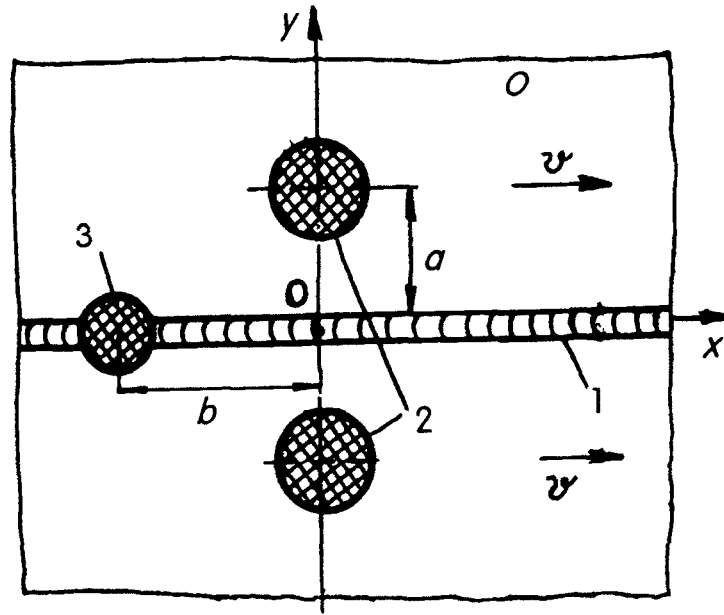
Scheme of thermal treatment of a plate with weld: (1) weld; (2) heating zones; (3) cooling zone.
